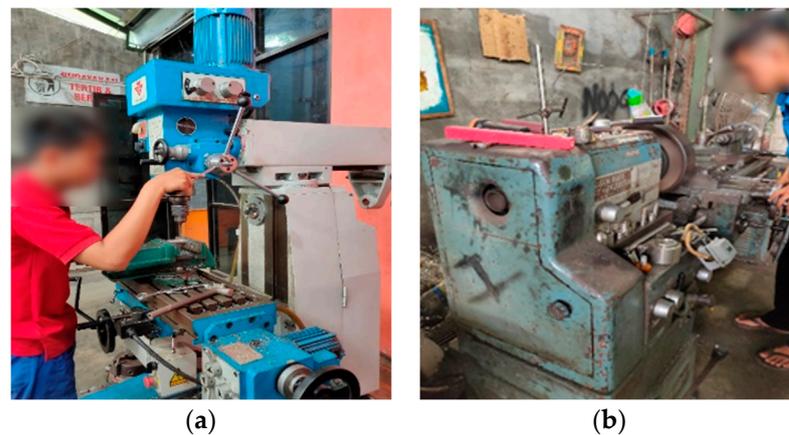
Component fabrication including (a) milling process and (b) lathe process.
